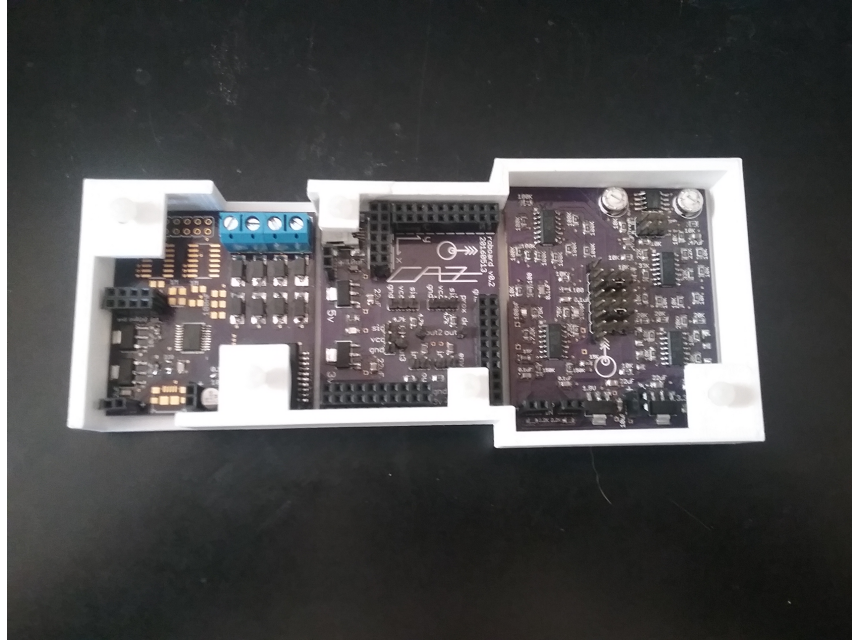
3D printed case to hold the robots' custom circuit boards.
